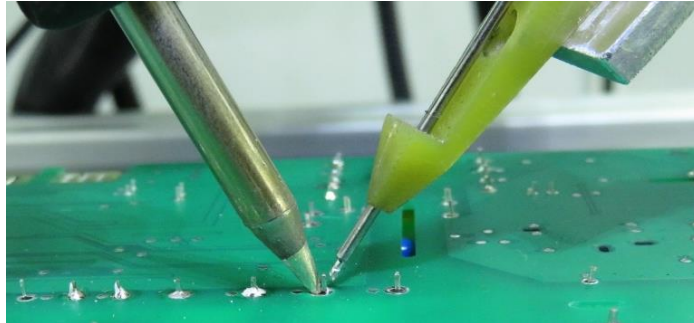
The angle which the soldering iron and wire feeder points to particular solder pad
